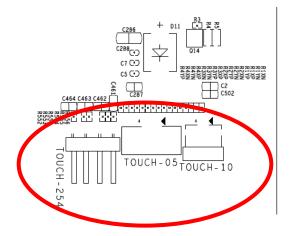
The 3 types of 4W touch-screen connectors: 2.54mm header, 1.0mm and 0.5mm FPC
